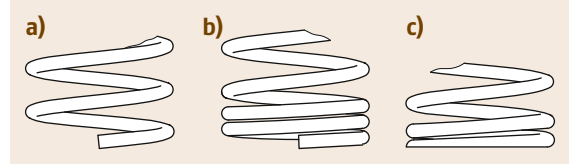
c Standard spring ends of helical compression springs: (a) unmachined, (b) closed and unmachined, and (c) closed and ground
